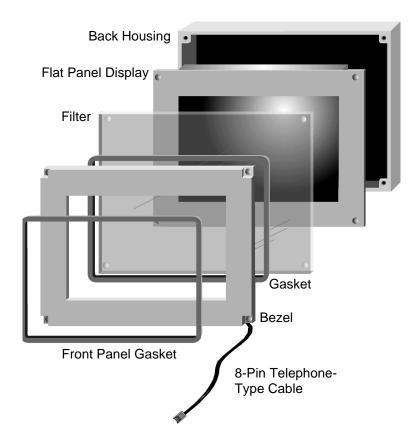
Typical NEMA 4 Mounting Method (Front View)
